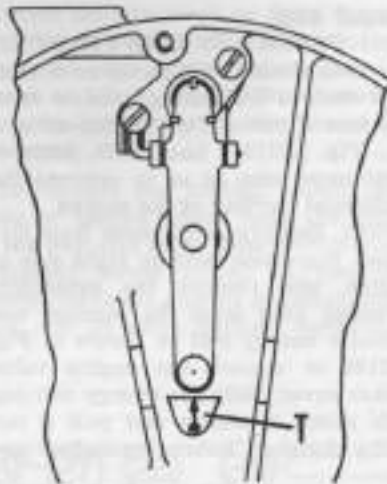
Ensign model R regulator. Port boss (T), which is marked with the arrow, is used for the purpose of setting the low-pressure valve lever.
